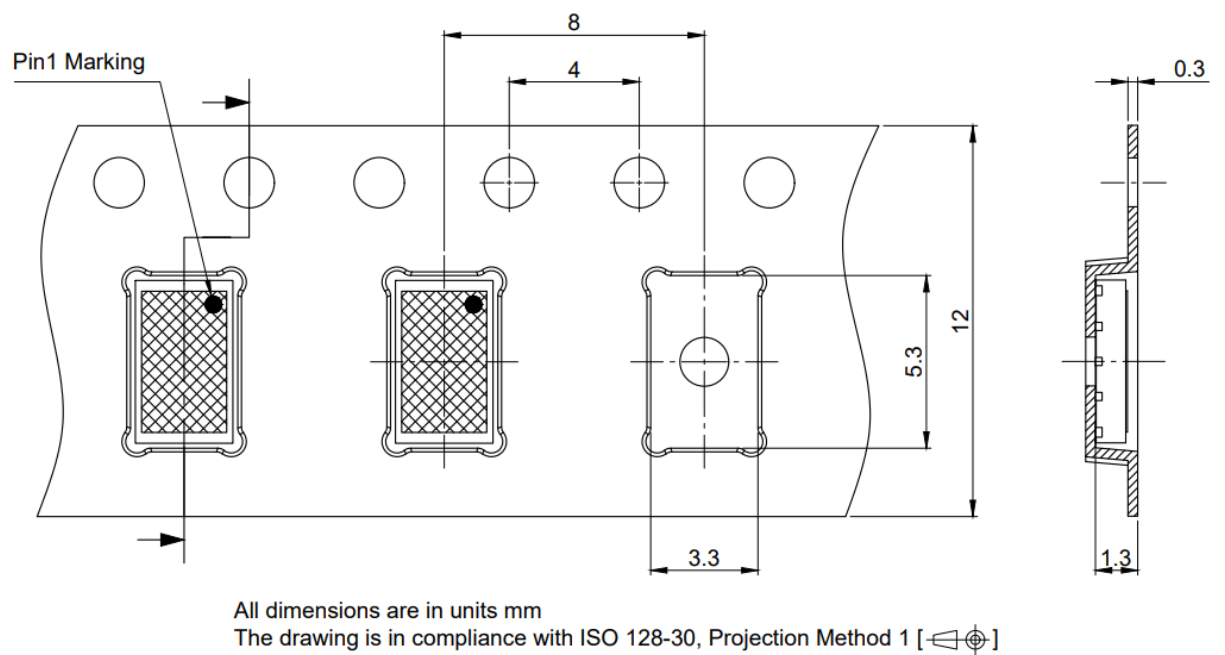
Packaging variant PG- TSON- 6 , dimensions in mm
